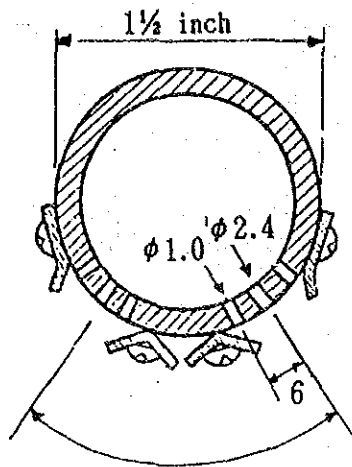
Embedding Assembly and Welding Surface Plate
